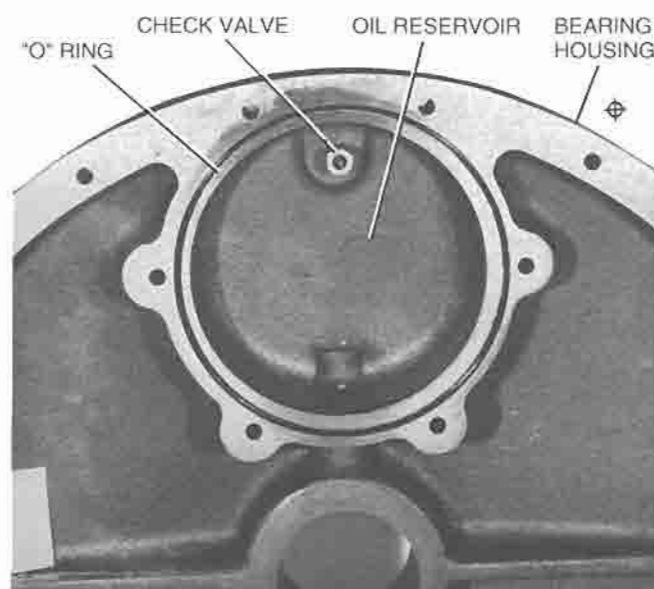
OIL RESERVOIR (BEARING HOUSING)
